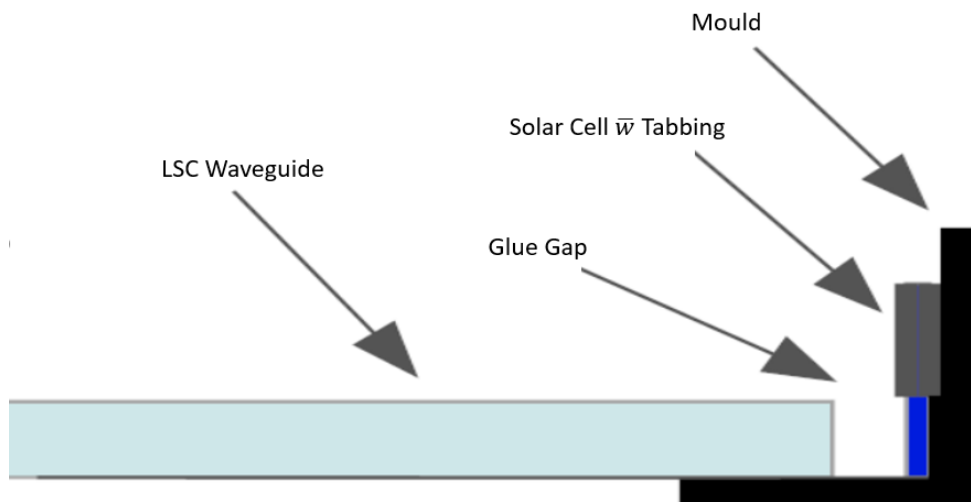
3D printed mould design used to attach solar cells and prevent glue fillets.
